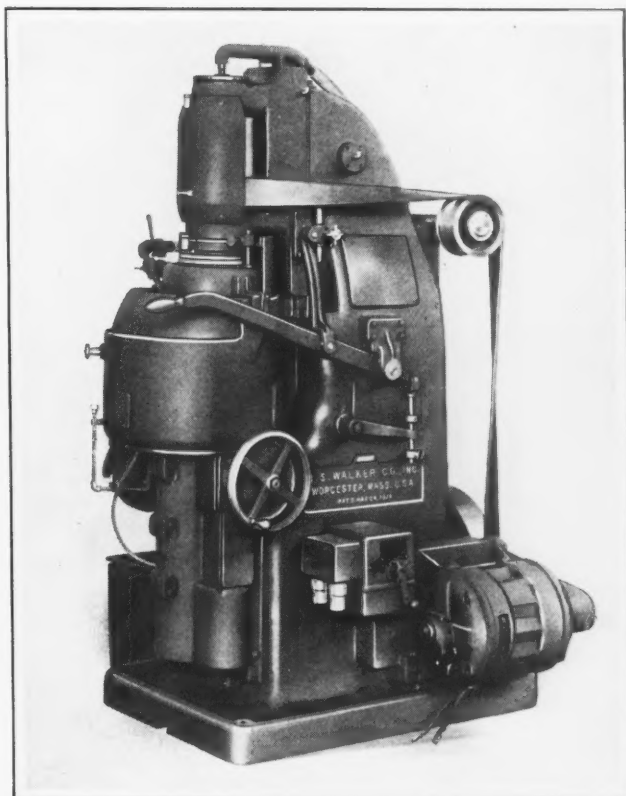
Right-hand View of Machine which grinds Concave and Convex as well as Flat Surfaces
